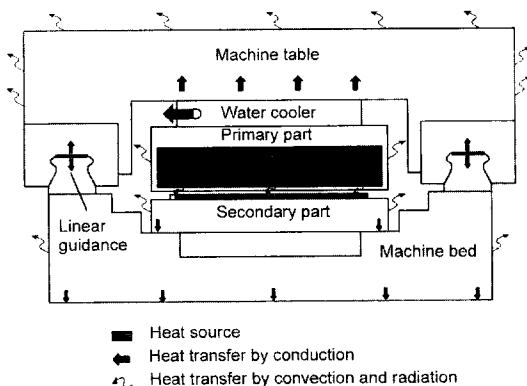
Heat transfer mechanism in machine structure with linear motor
